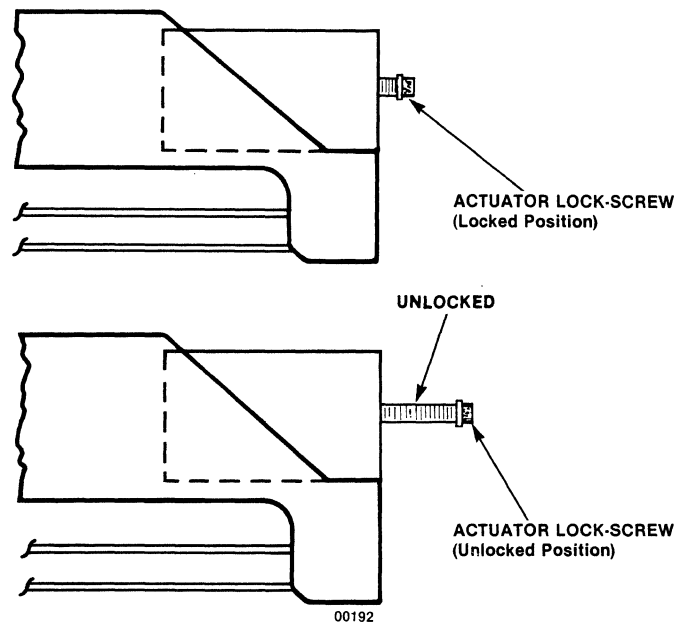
Linear Voice-Coil Actuator Lockscrew, BASF Drives
